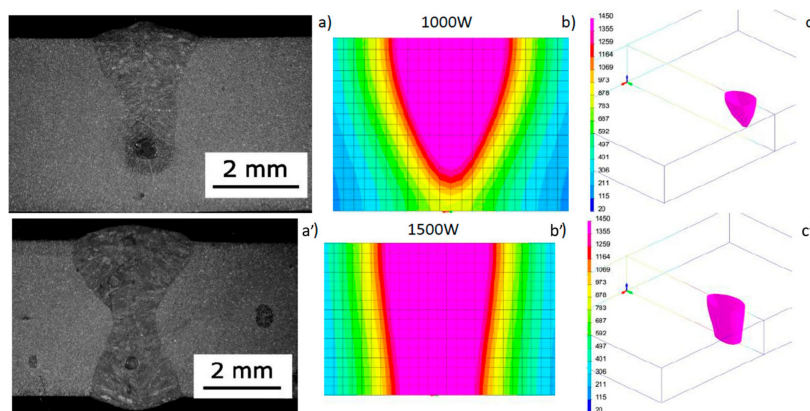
View of the macrostructure of the bead (a, a') in bead-on-plate welding tests performed on a 4.0-mm-thick sample of AISI304 steel using the Trumpf TruDisk 3302 disk laser at laser beam power accordingly 1000 and 1500 W and welding speed of 8.3 mm/s; (b, b') a cross-sectional view of the molten pool obtained as a result of numerical simulation; (c, c') the 1450 °C iso-surface.
